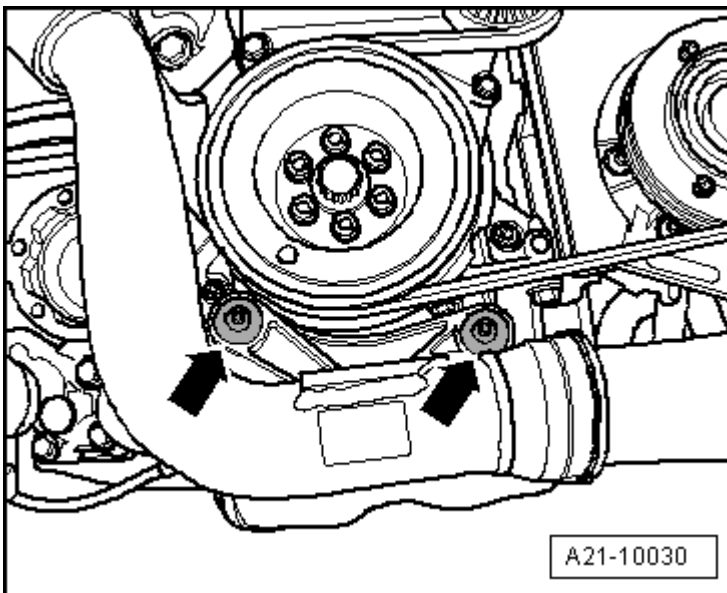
Identifying Toothed Belt Guard Bolts
